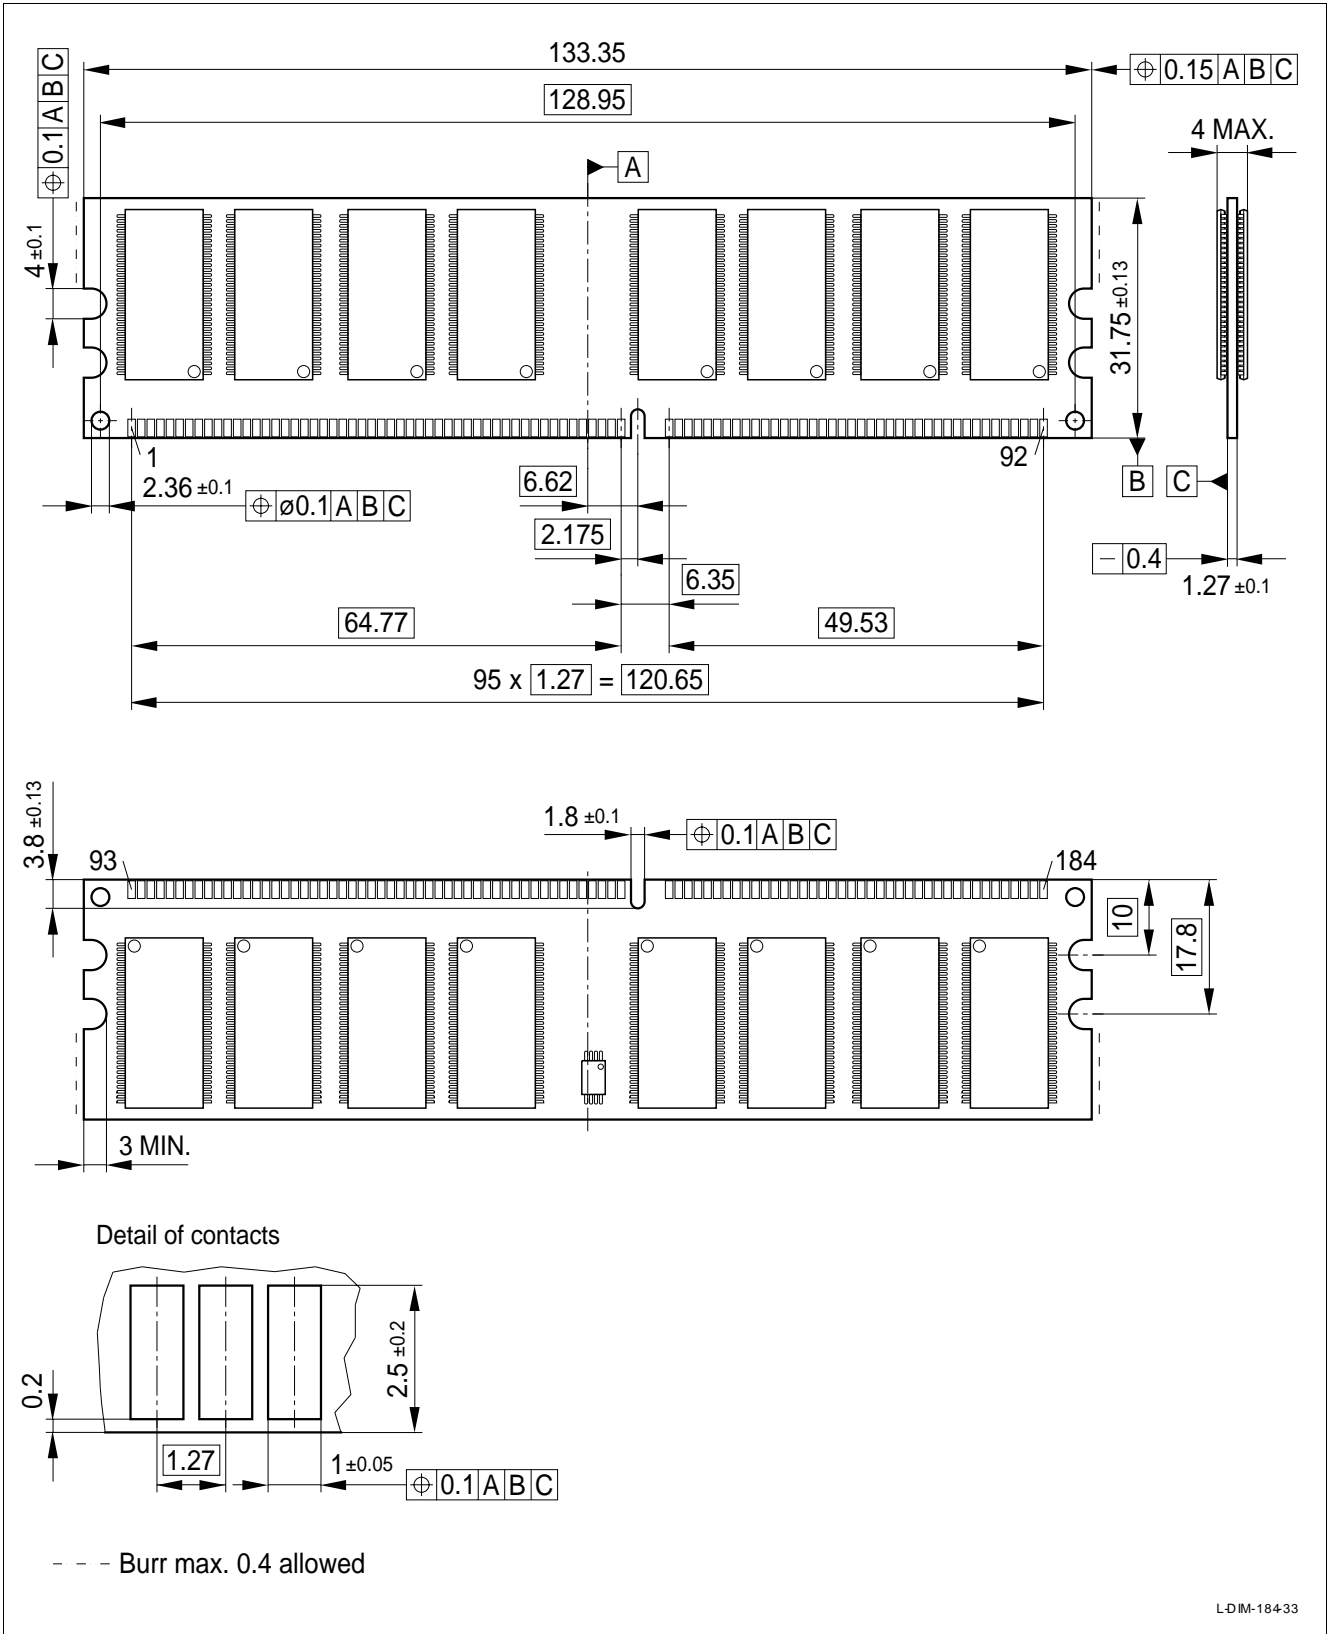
Package Outline - Raw Card B (512 MByte, 2 Rank Module, -5 and -6, Non ECC)
